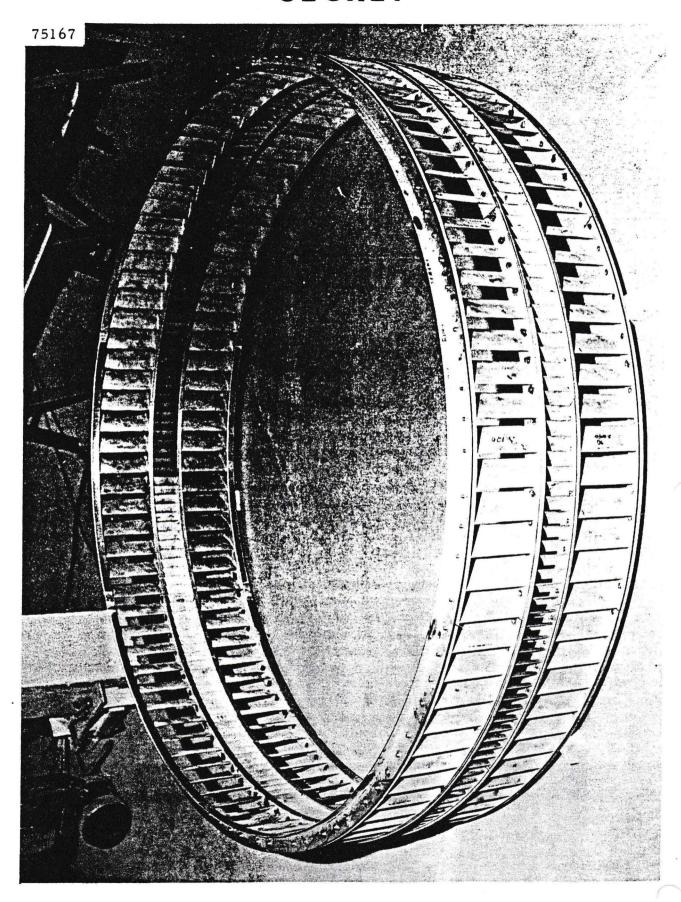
TURBINE AND COMPRESSOR BLADE ASSEMBLY - ONE COMPLETE STAGE (APPROX. 100" DIA.)
